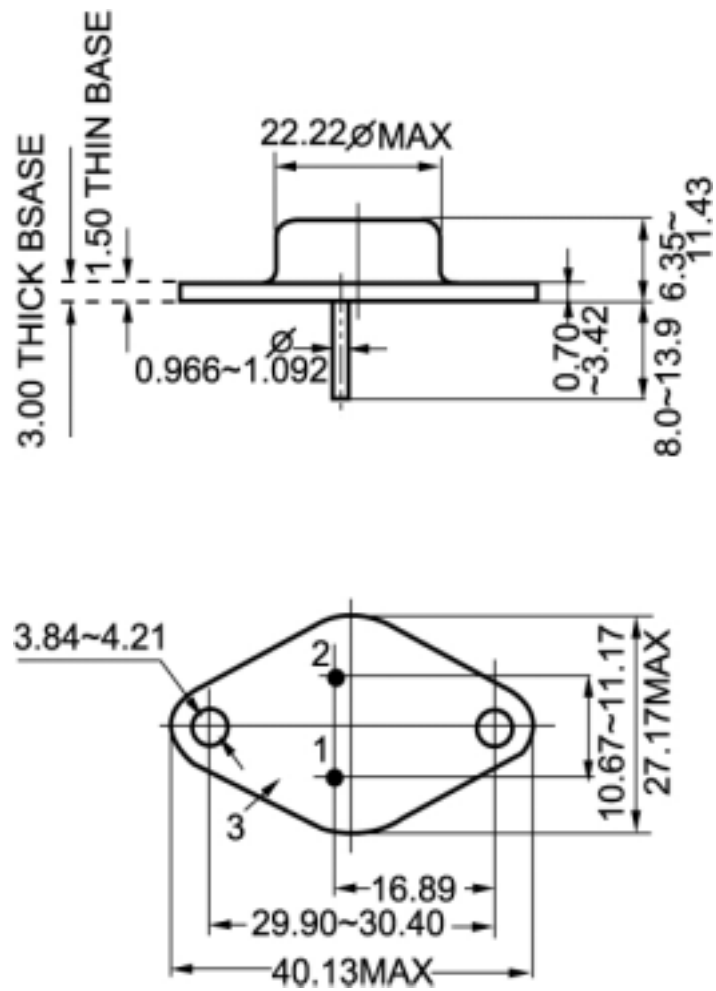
outline dimensions (unindicated tolerance:  $\pm 0.1$ mm)
